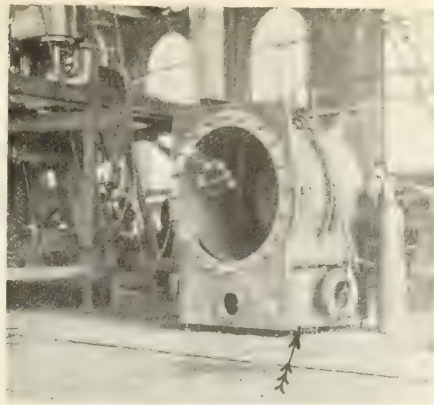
LARGE MARINE ENGINE CYLINDER REPAIRED BY WELDING.
